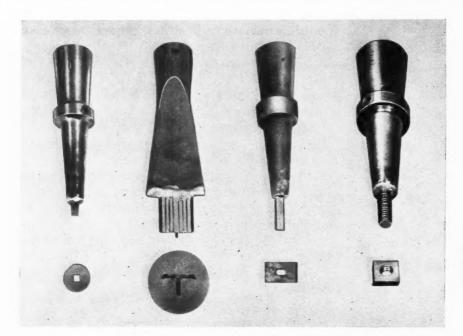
Carbide samples, illustrating some of the odd-shaped holes that can be produced by the Cavitron process. Tips of the desired shape are brazed to the steel tools
